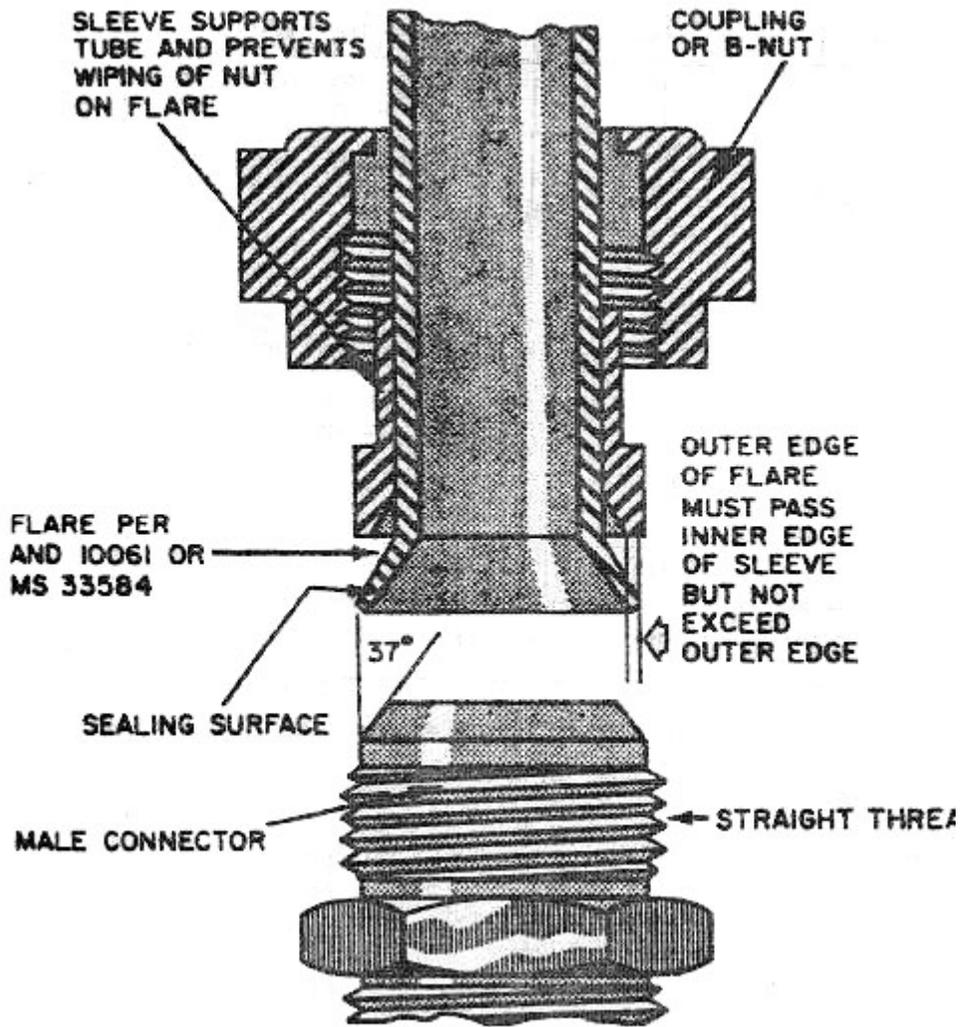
3-Piece AN Flared Tube Fitting Per MS33656
